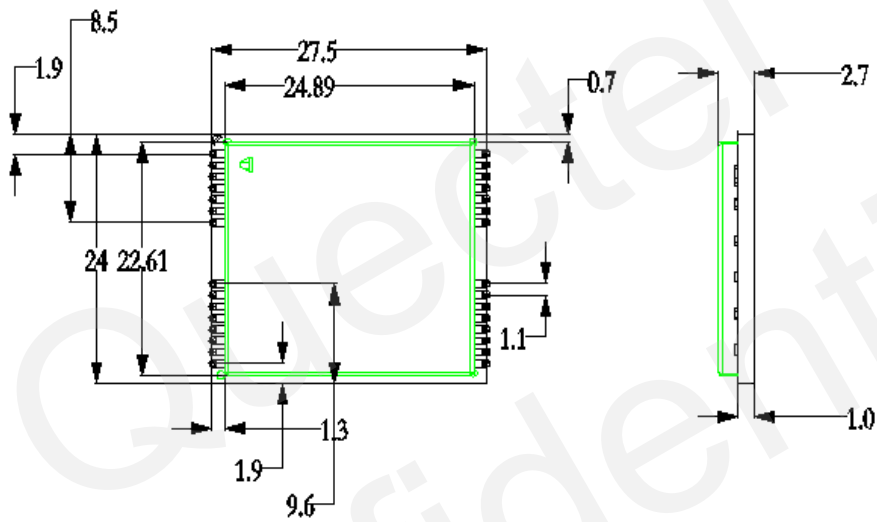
M72 Top and Side Dimensions (Unit: mm)
